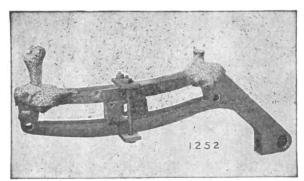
Welded Locomotive Link with Molds Removed Courtesy of Goldschmidt Thermit Company
